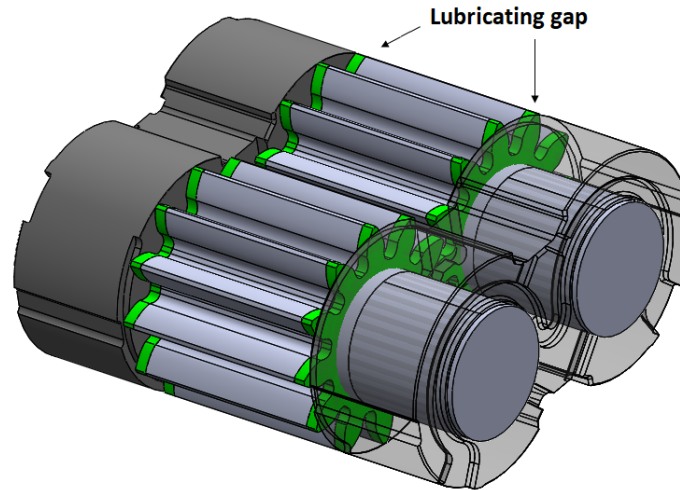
Assembly of gear wheels and lateral plates. The fluid gap that allows the coupling to be lubricated is highlighted in green.
